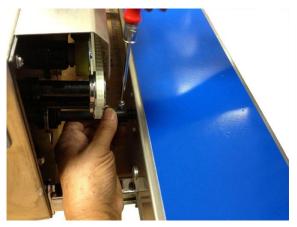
Tighten the screw on the drive shaft to lock the conveyor middle post in place.
